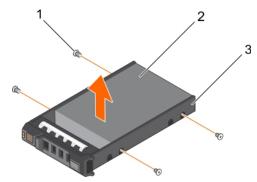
Removing a hot swappable hard drive from a hard drive carrier
